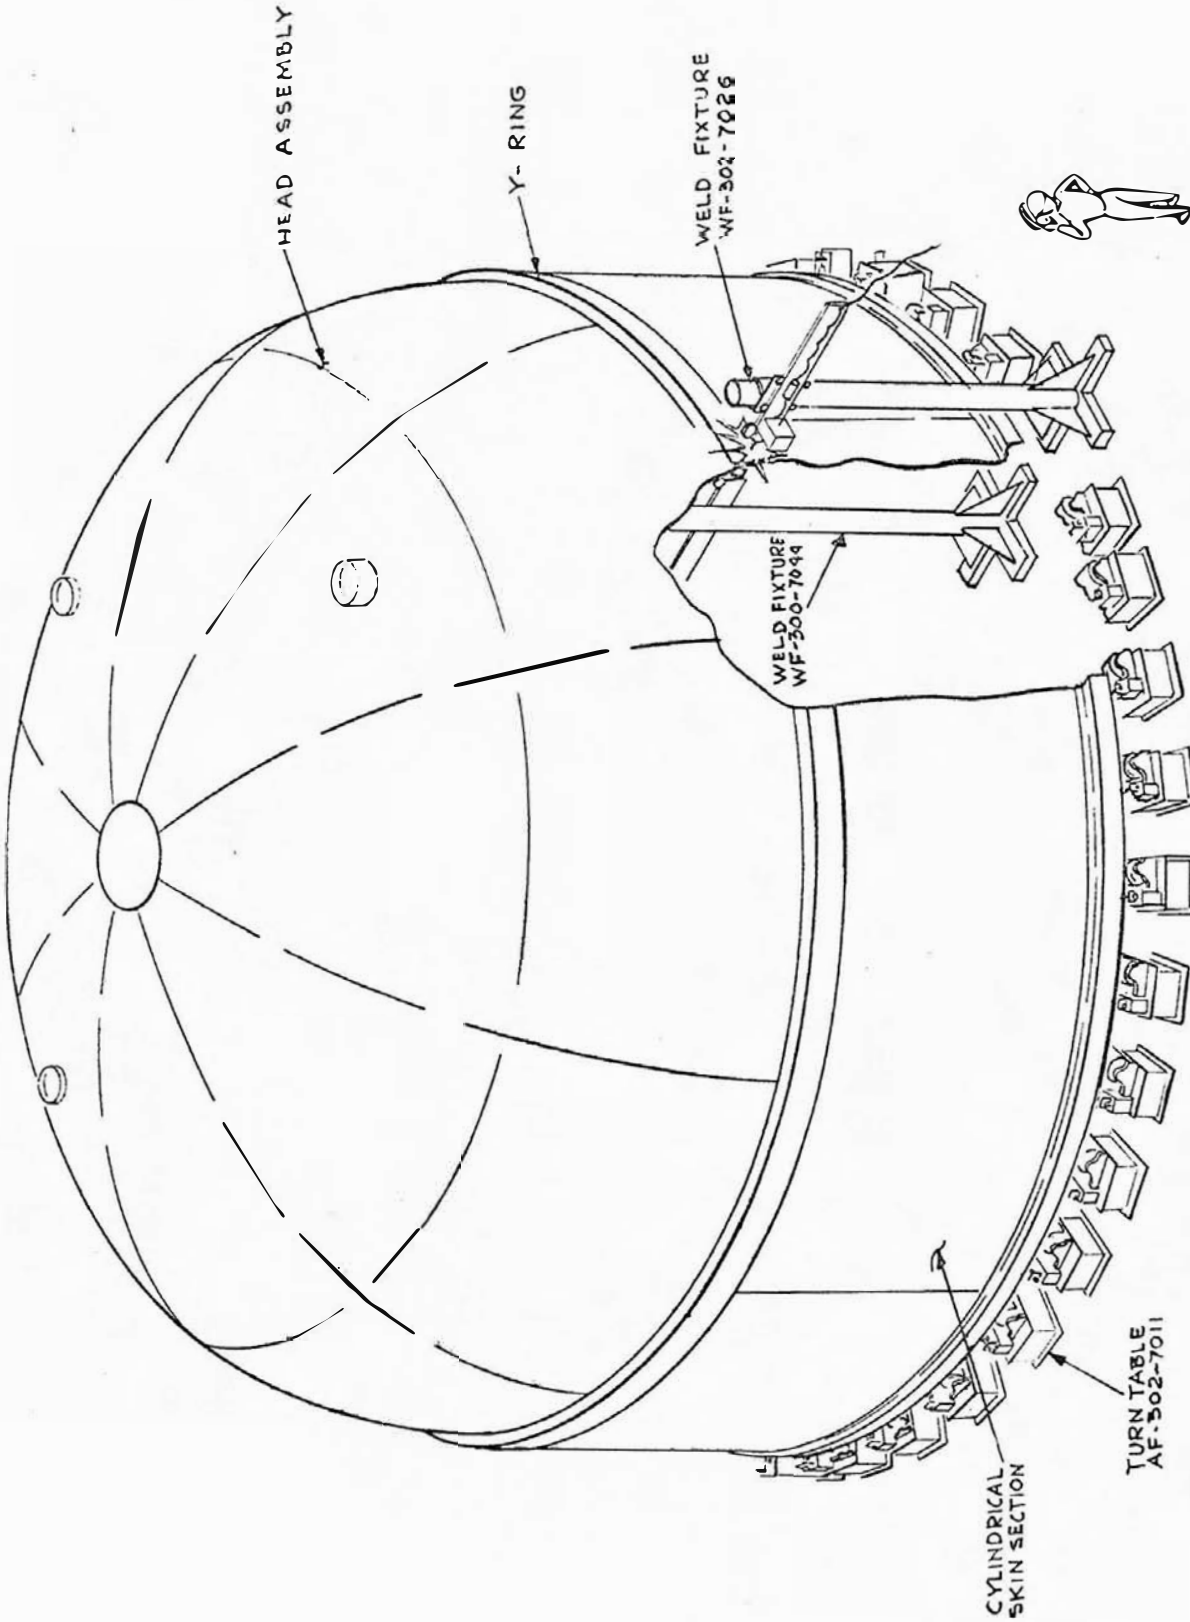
Welding Cylindrical Skin Section to Head Assembly
